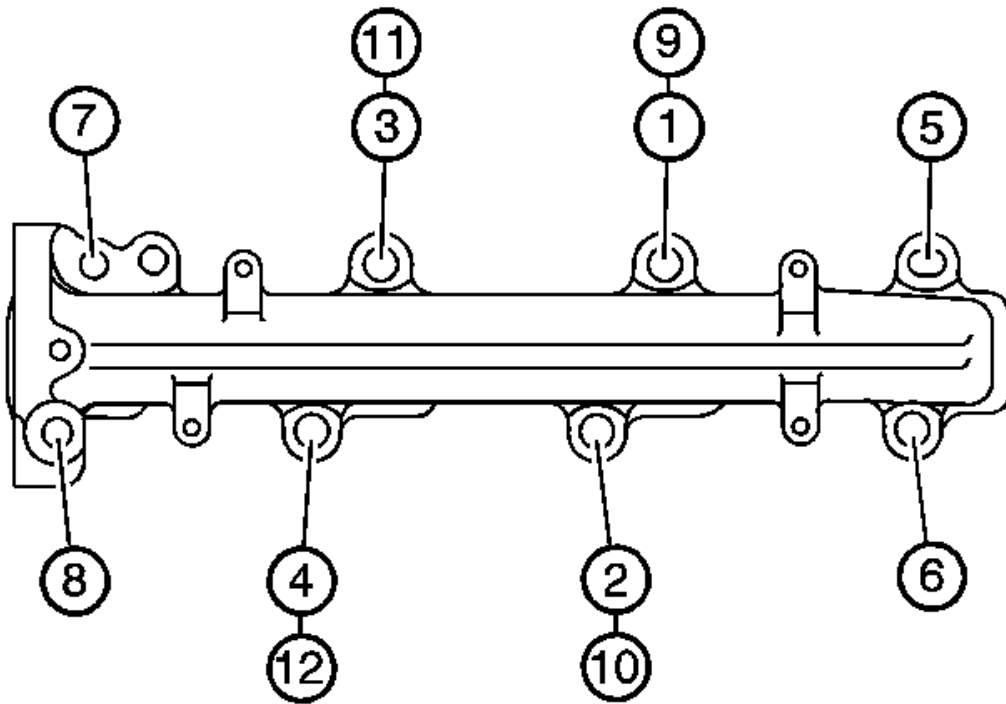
Exhaust Manifold Bolt Tightening Sequence -- Right Side
